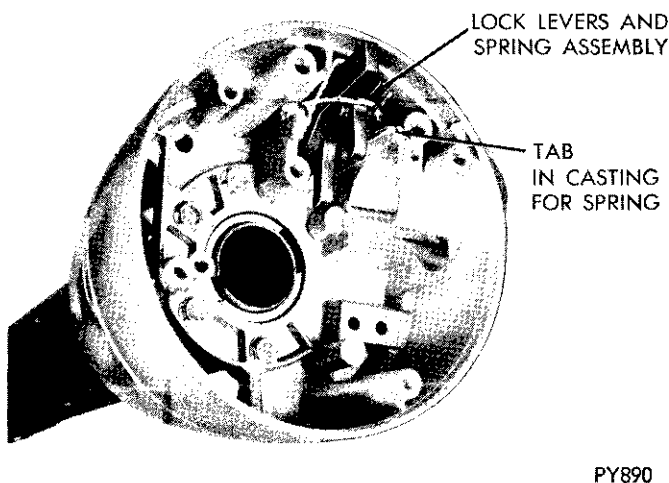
Lock Levers and Spring Assembly Installed in Housing
